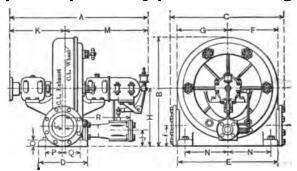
DIMENSION DRAWING OF STURTEVANT TURBINE.
